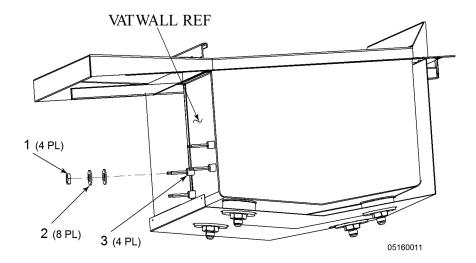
Positioning Heating Element Assembly Into Fryer
